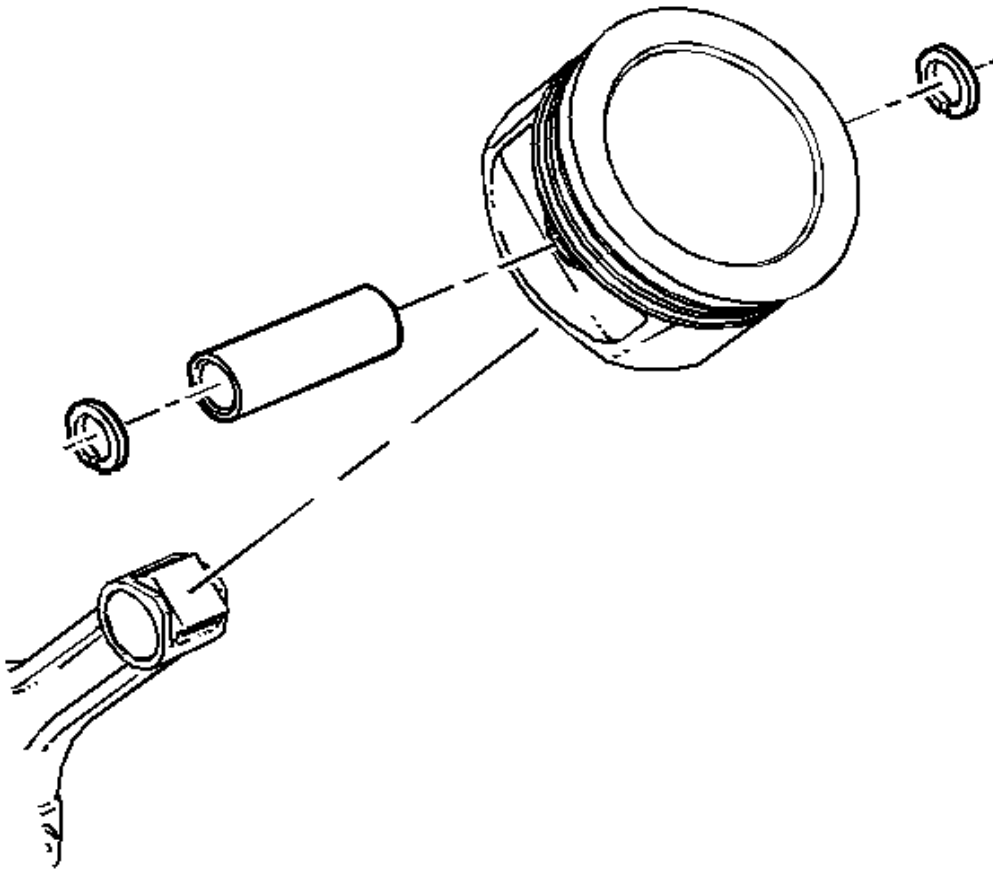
View Of Piston Pin, Piston, Clips & Connecting Rod
